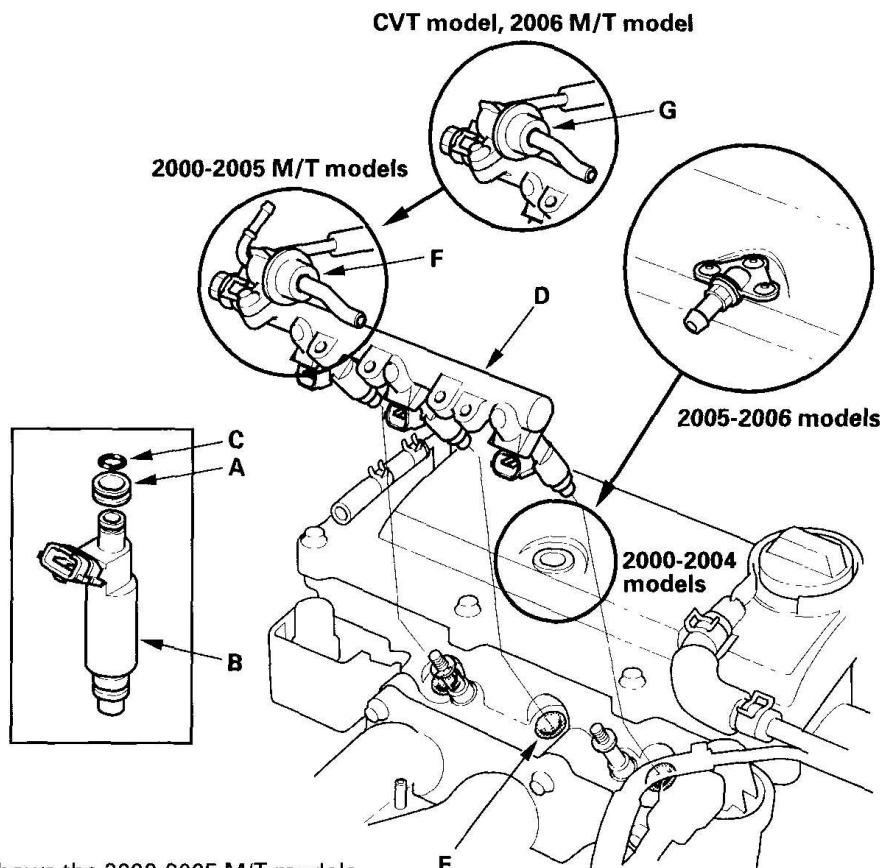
Sliding Cushion Rings Onto Fuel Injectors
